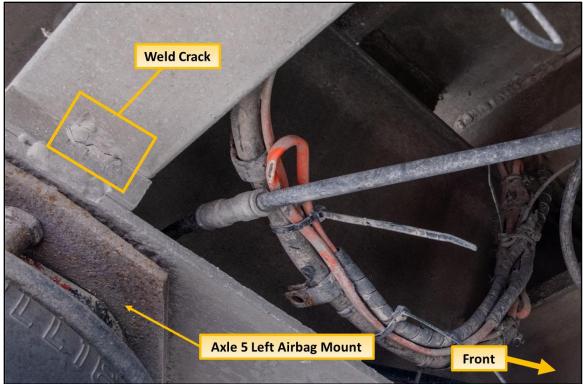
Weld crack at the left-side axle 5 airbag mount.
